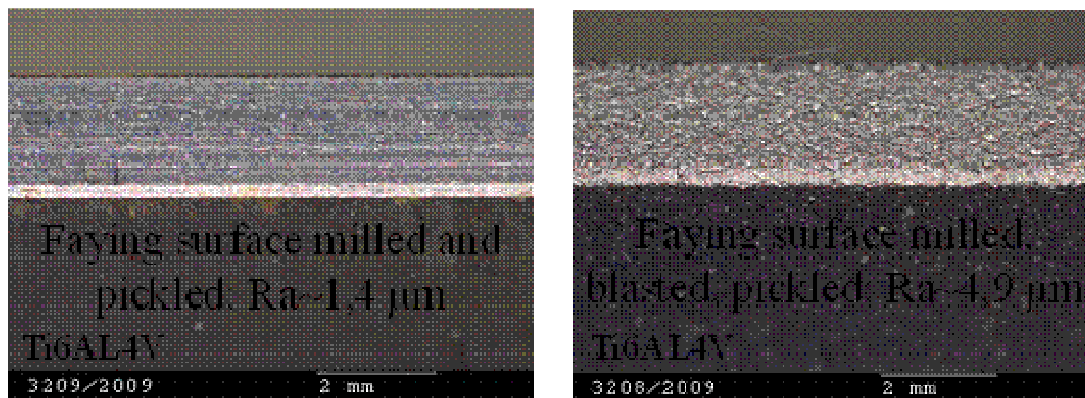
Surface preparation of Ti before welding: left milling and pickling; right milling, steel shot blasting and pickling
